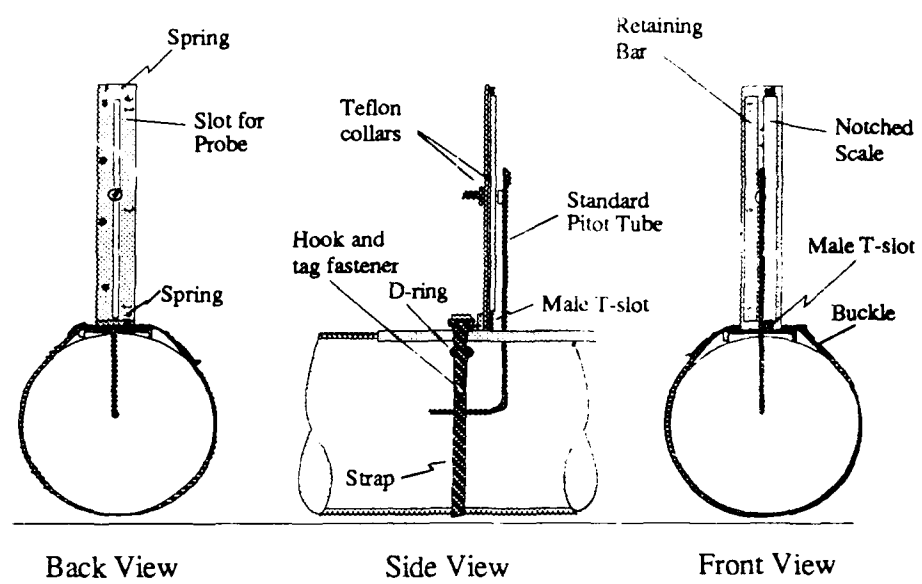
Diagram of Pitot Tube Holding Device and Mounting
